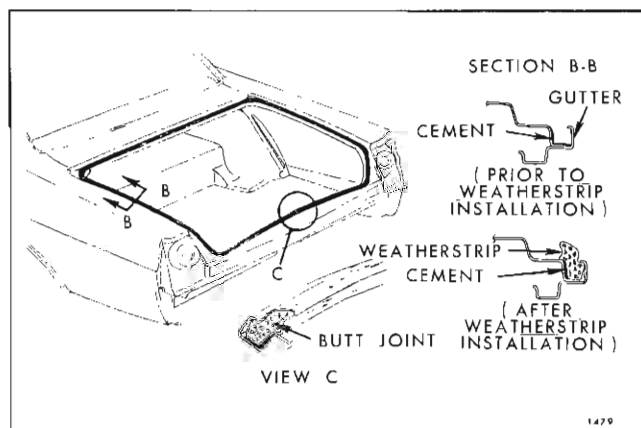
F21—Rear Compartment Weatherstrip Assembly
